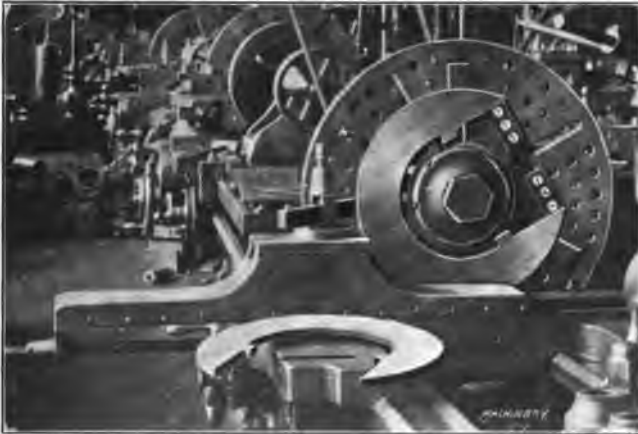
Facing the Bronze Liners for the Hub Bearing, on a Faceplate provided with Special Jaws
